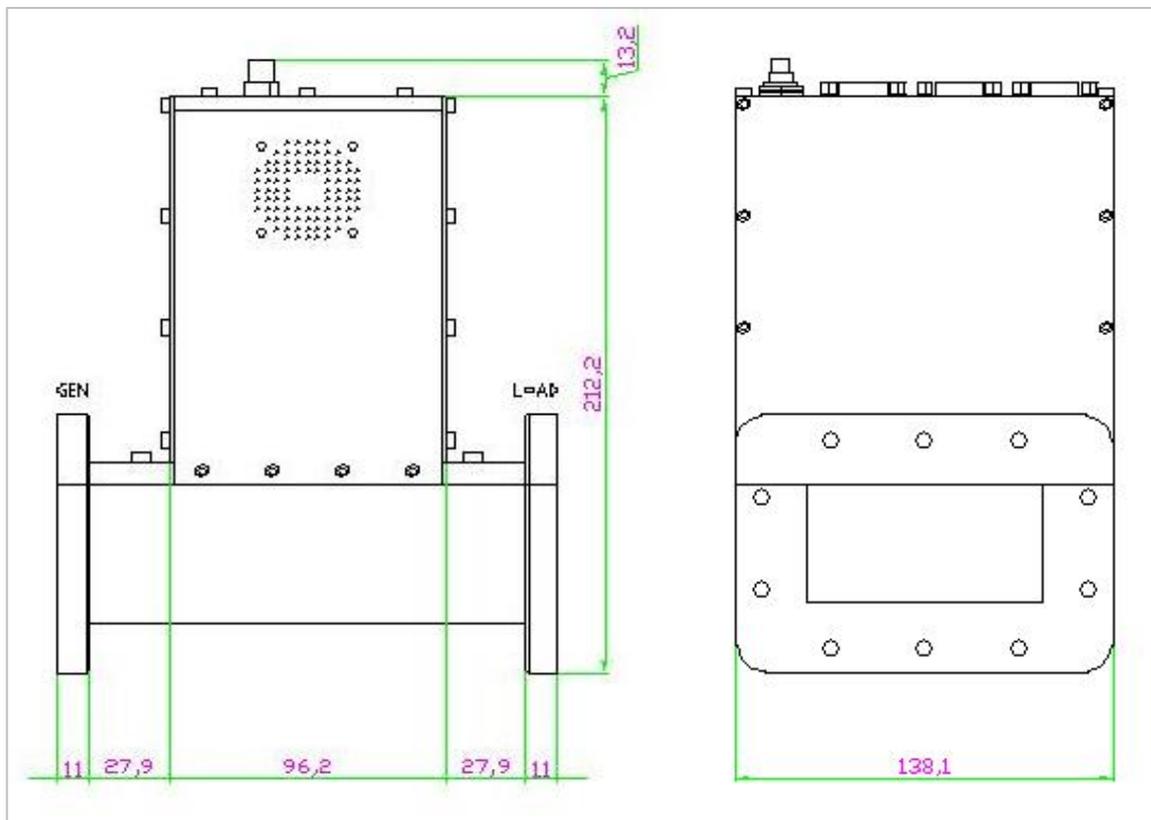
Basic HOMER Analyzer dimensions. All dimensions are in millimeters.
